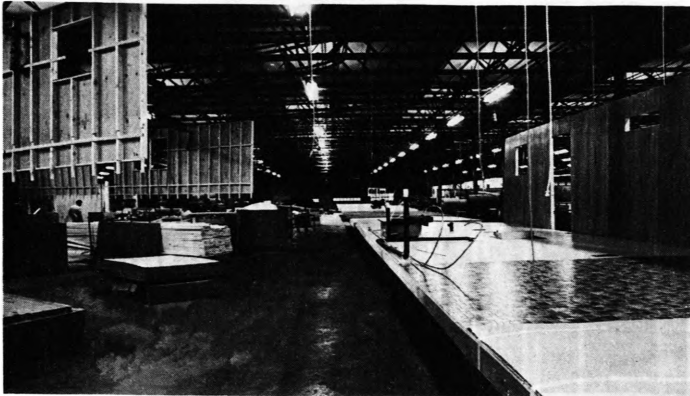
Main Assembly Line (End-by-End Type): Plumbing Fixture and Cabinetry Installation (Richardson Homes Corp., Elkhart, Ind.)
